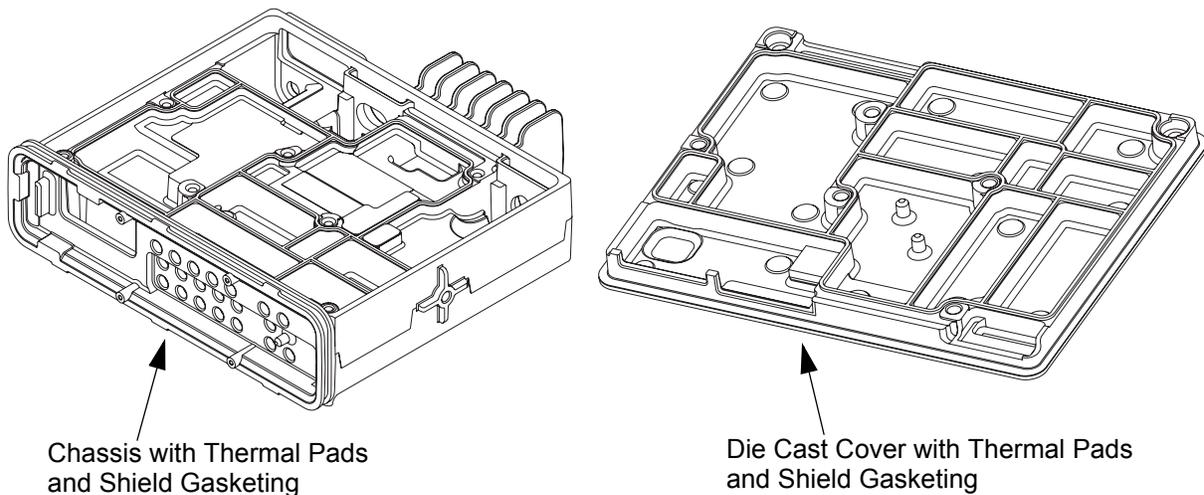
Thermal Pads and Shield Gasketing on Chassis and Die Cast Cover
